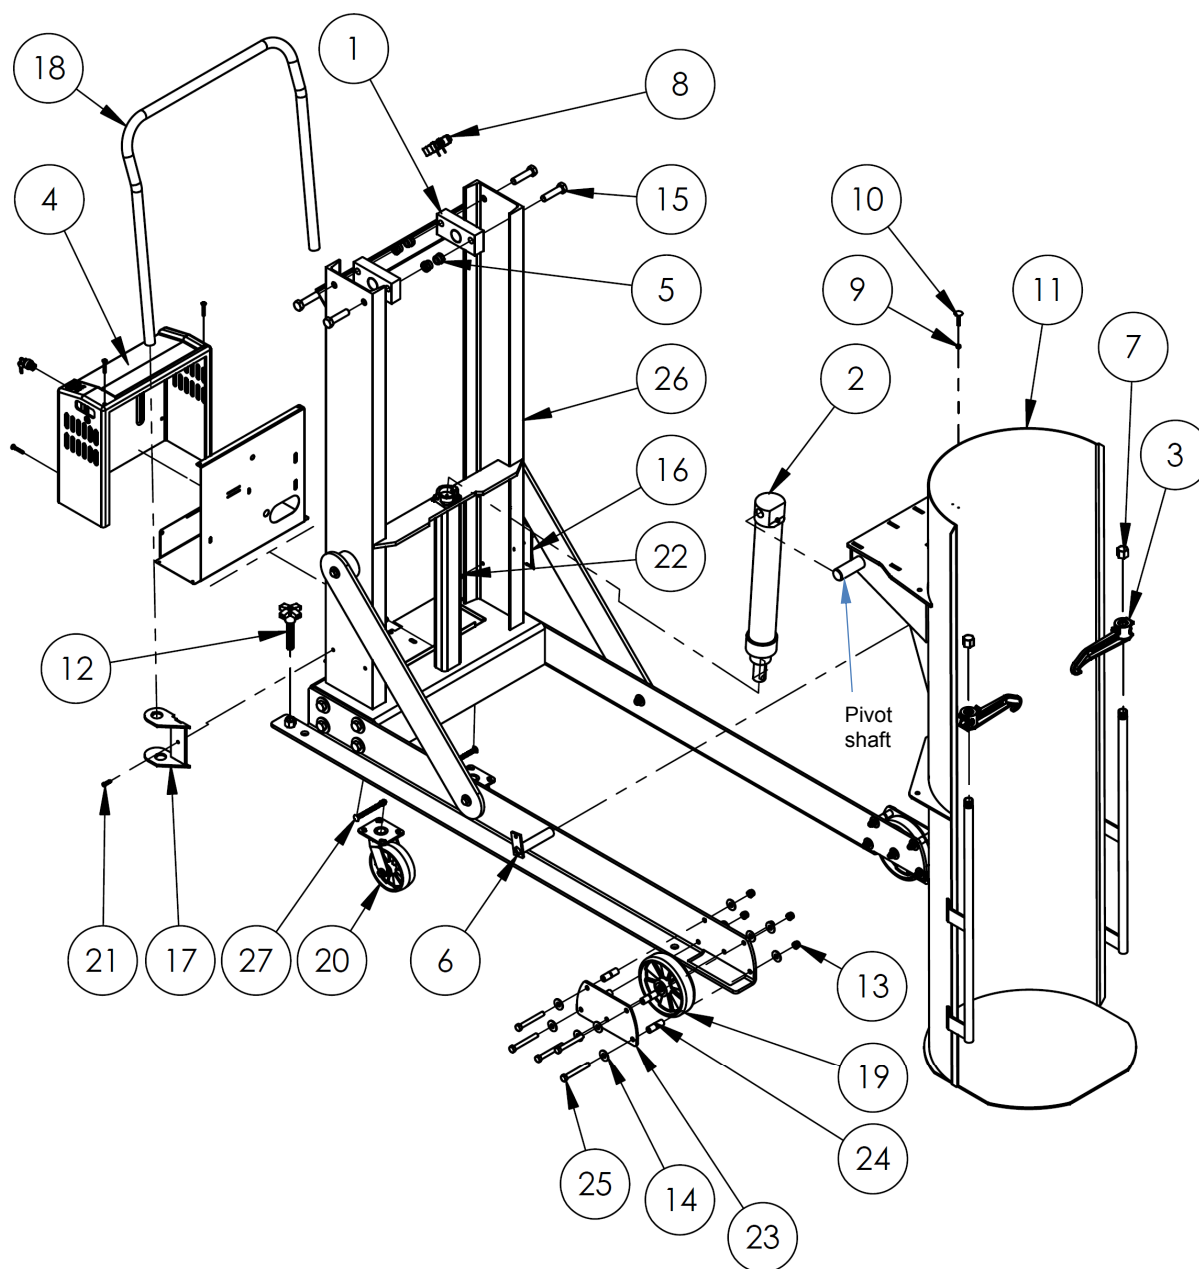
HDD-36-P series portable dumpers exploded parts diagram and bill of materials
